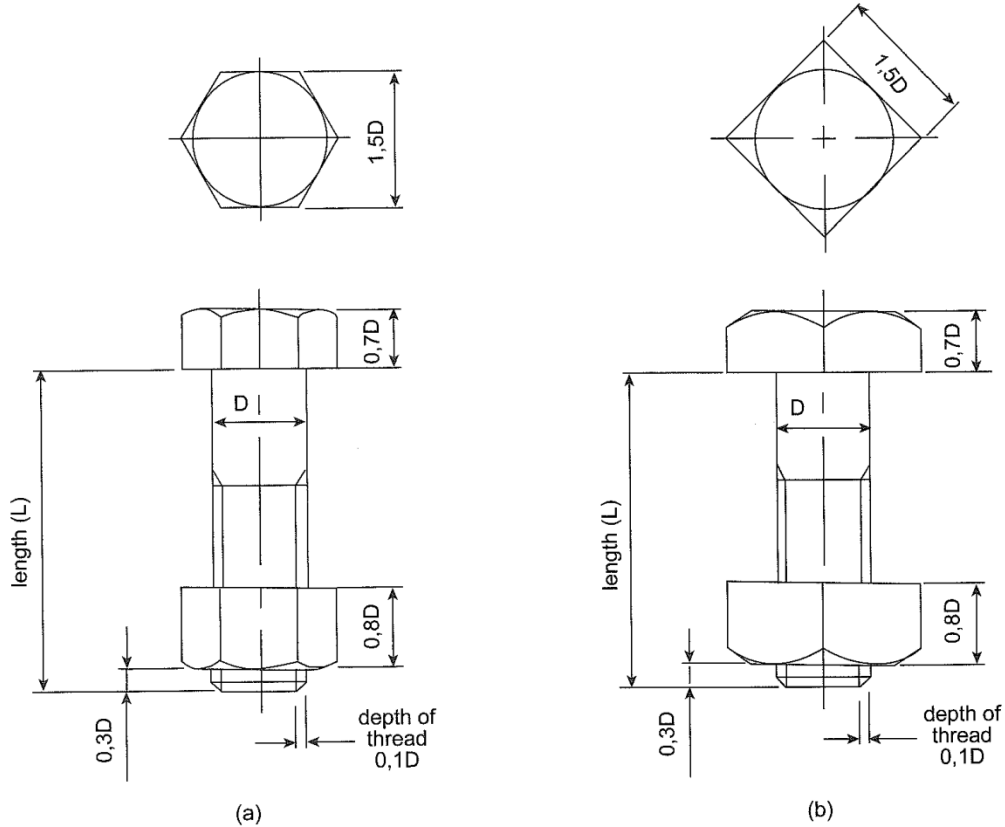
(a) A hexagonal bolt and nut and (b) a square-head bolt and nut
